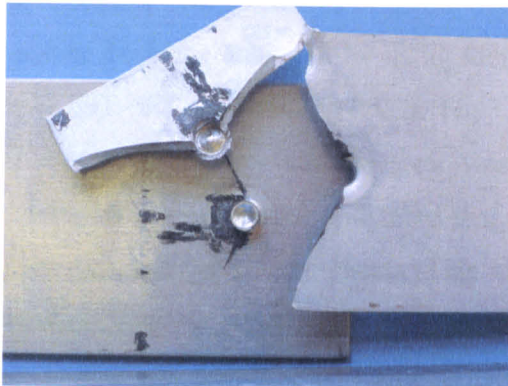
shows the failure modes that occurred during fatigue testing. Similar to the FSN5 series of fastenings with a (1mm+2mm) combination, the FSA6 series of fastenings with a (0.9mm+2mm) combination failed by *sheet material failure*, as shown in Fig.3.28 (a). The 0.9mm AA6111 pierced sheet fractured, while the rivet still connected the two sheets. At applied loads at and above 3.6kN, the FSA6 series of fastenings with a (2mm+2mm) combination failed by *rivet fracture*. At applied loads at and lower than 3.0kN, *sheet material failure* dominated the failure mode, as shown in Figs.3.28 (b) and (c). At all load levels, sheet material fracture was suffered only by the locked sheet, whilst the AA6111 pierced sheet underwent very little deformation. This was different from the observations of the failure mode for the FSN5 series of fastenings with a (2mm+2mm) combination. This indicated that the sheet material properties might affect the failure mode. Black-coloured fretting scars also formed at the interface between the two riveted sheets indicating that fretting had taken place.
